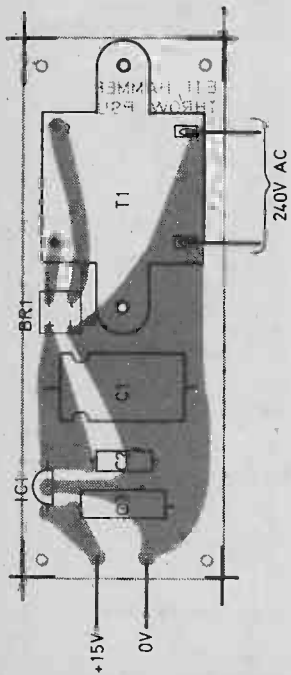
Component overlay of PSU mains earth is connected to T1 by a solder tag under the mounting bolt. The transformer's screen should also be connected to earth.
